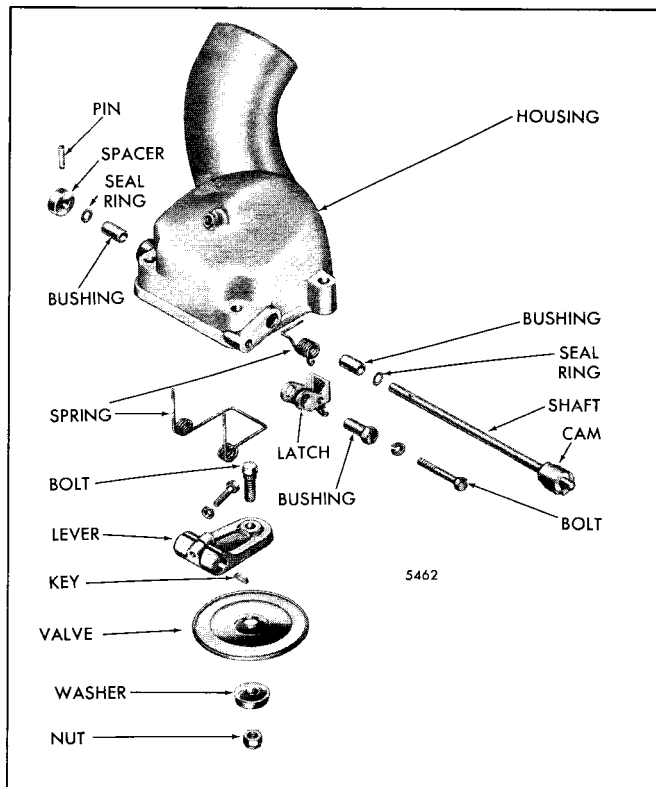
Intercooled Engine Air Shutdown Housing Assembly
